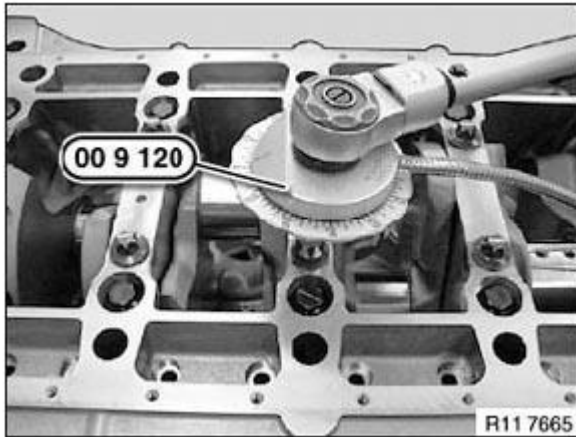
Identifying M11 Bearing Seat Bolts
